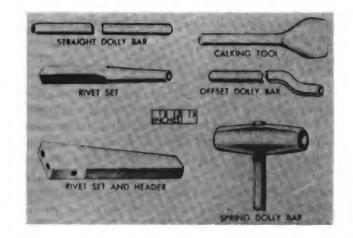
Calking tool, rivet sets, and dolly bars.
